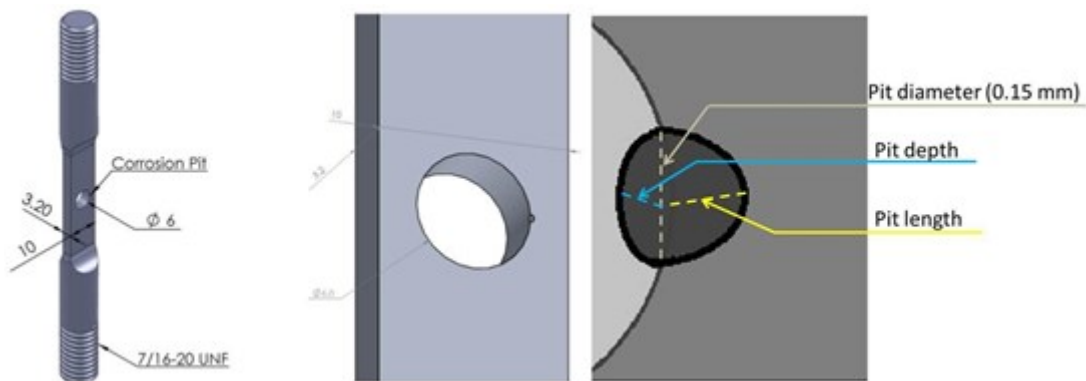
Specimen geometry and corrosion pit with dimensions (in mm)
